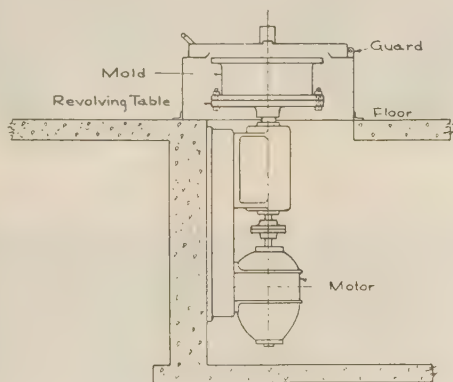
PIG-TYPE CENTRIFUGAL CASTING MACHINE
